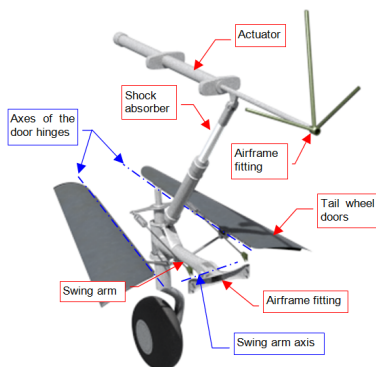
ELEMENTS OF THE P-40 TAIL WHEEL ASSEMBLY
